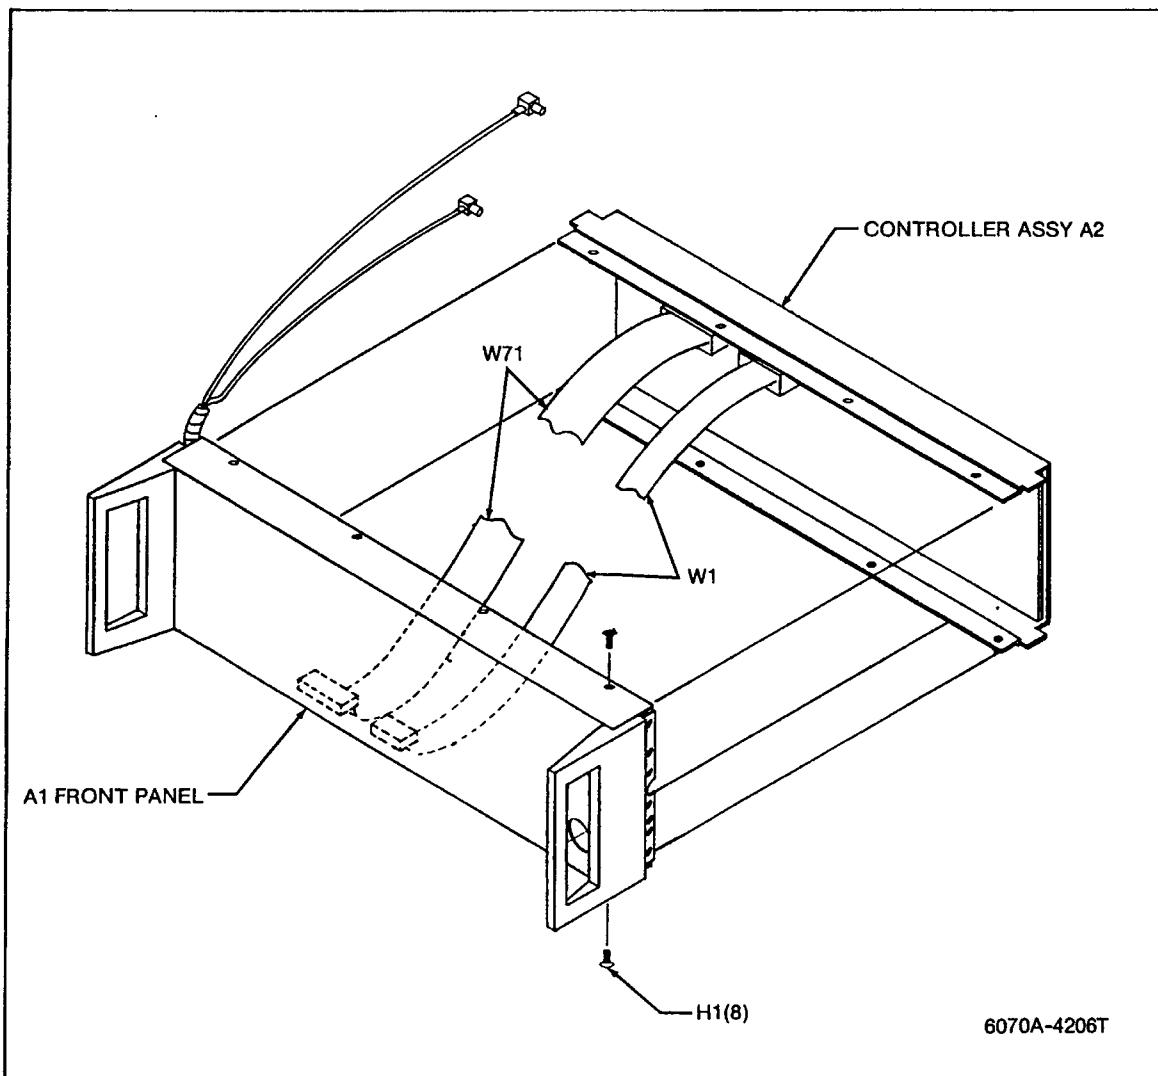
A1/A2 Front Panel and Controller Assembly
